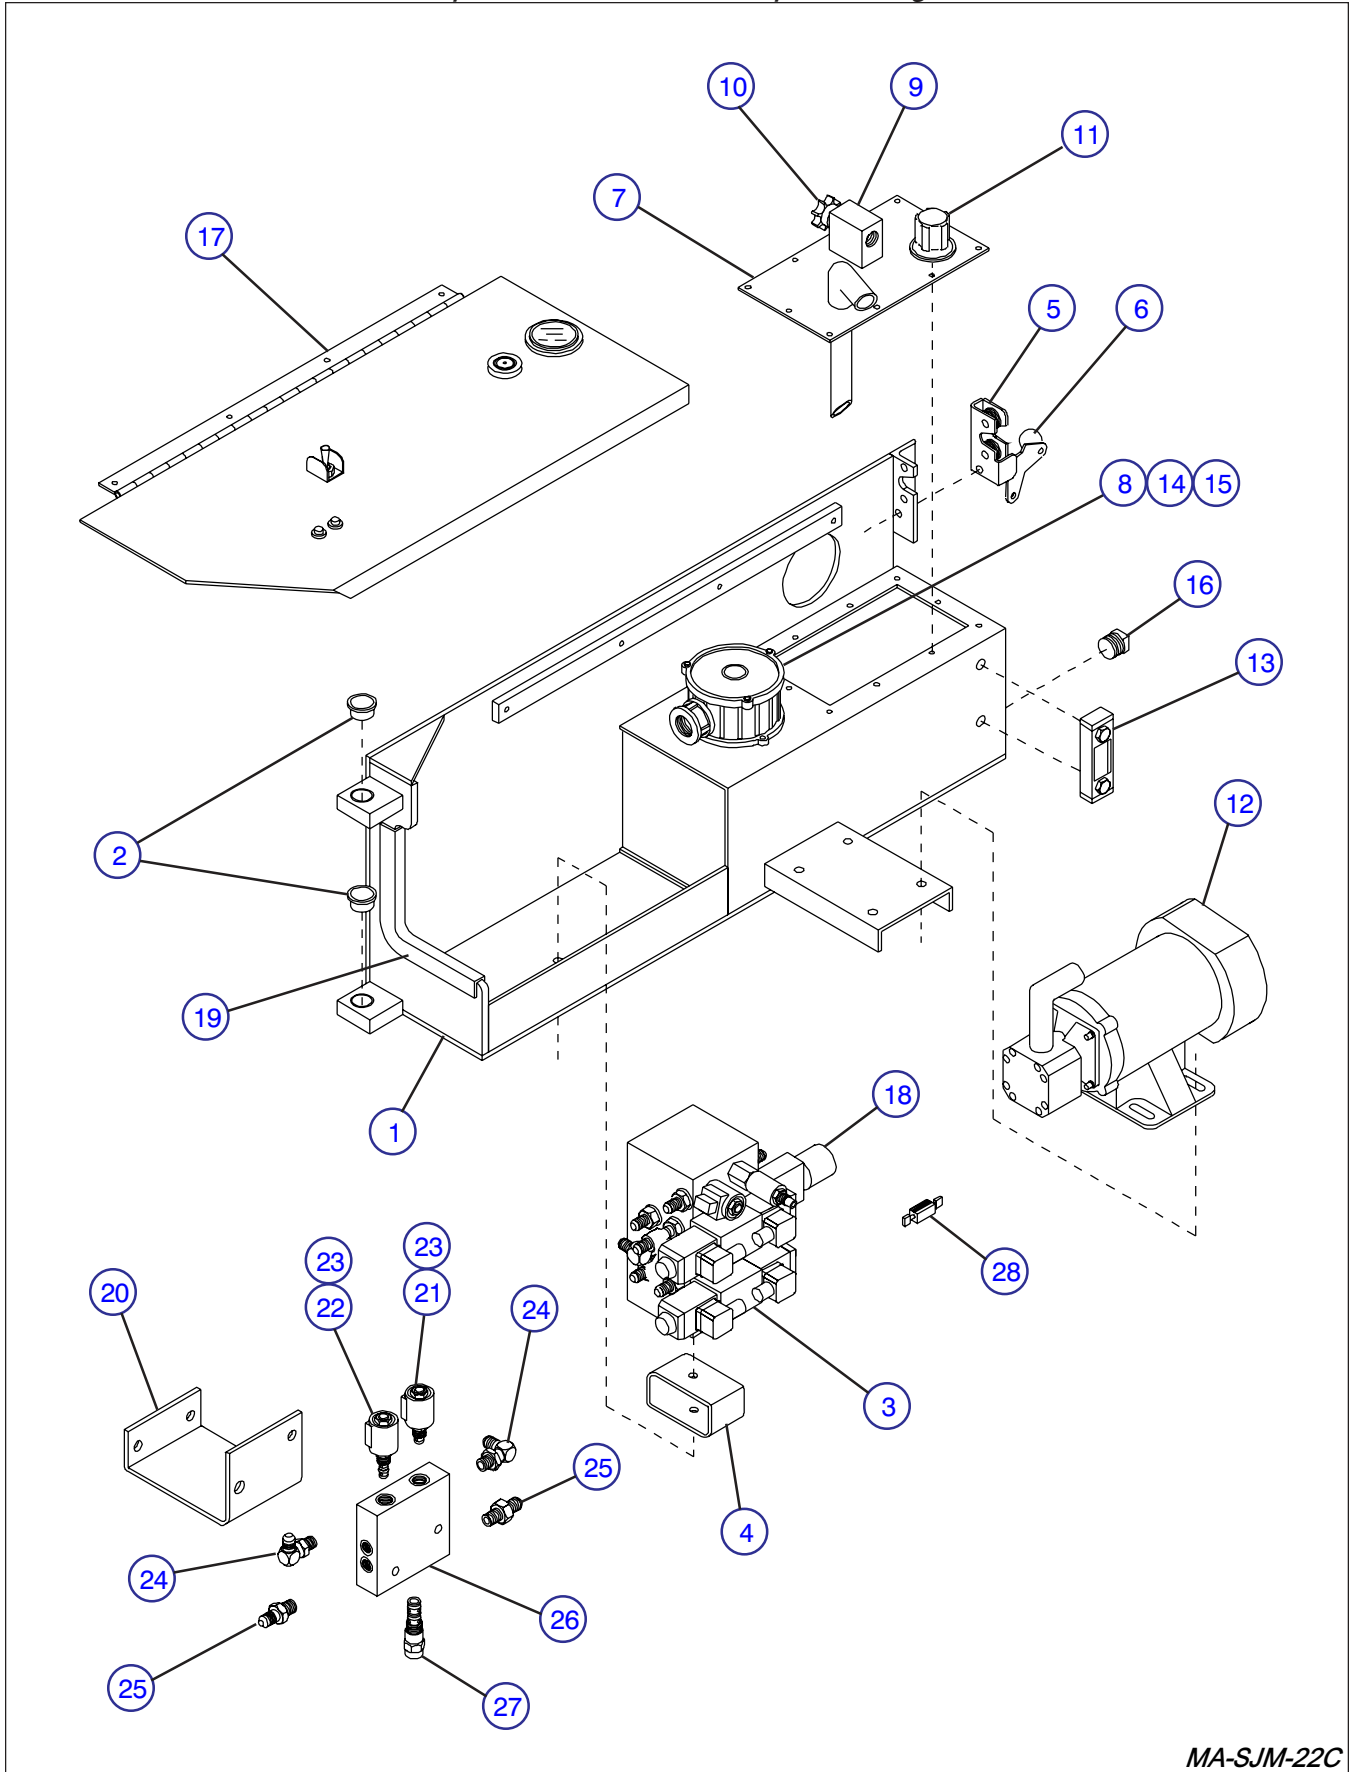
HYDRAULIC/ELECTRIC TRAY ASSEMBLY
